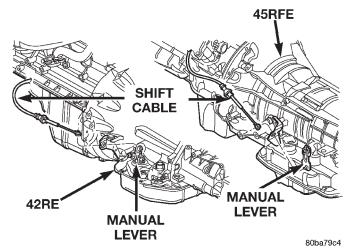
Shift Cable Attachment At Transmission BAND ADJUSTMENTS
